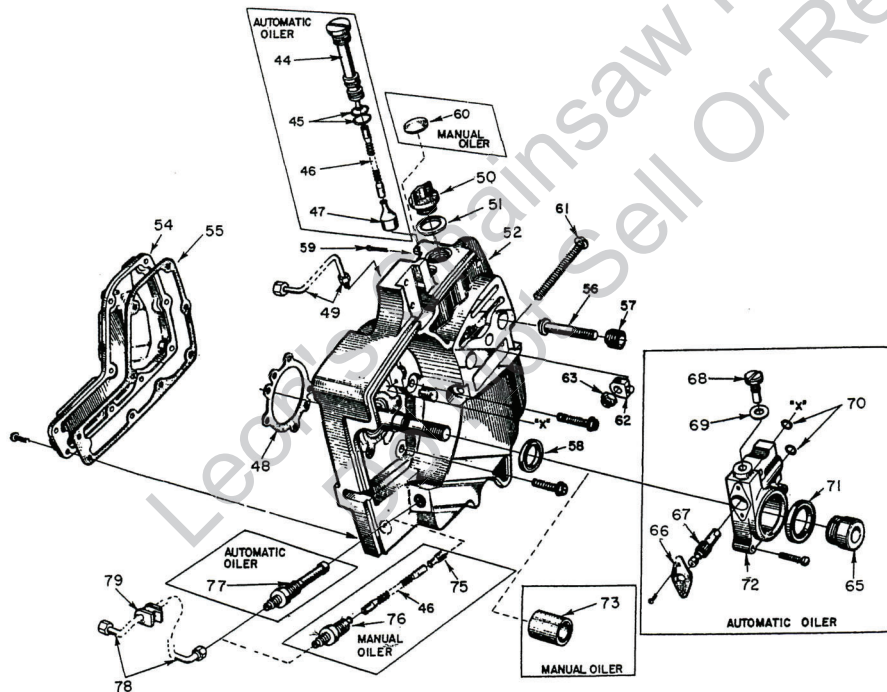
A—Exploded view showing drive case with automatic chain oiler pump, oil pickups and late type removable oil reservoir cover (54). On all models except XL-12, XL-15 and Super XL-12, guide bar studs (56) are retained in drivecase by threaded inserts (57). Spacer sleeve (73) is used on model Super XL which is not equipped with automatic oiler pump.
